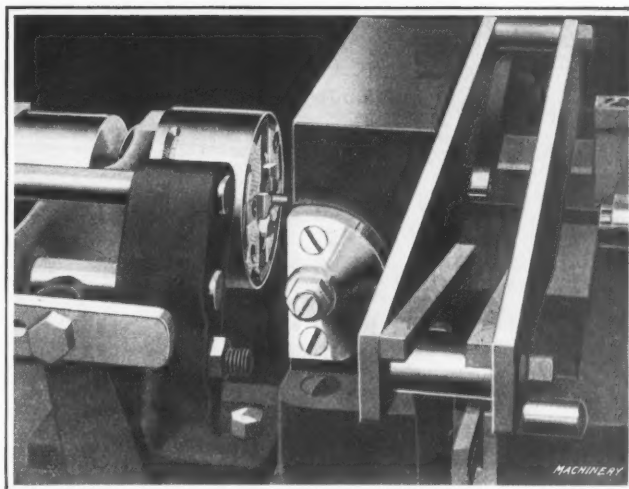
Close View of Threading Die and Magazine Feed on Machine shown in Fig. 1
